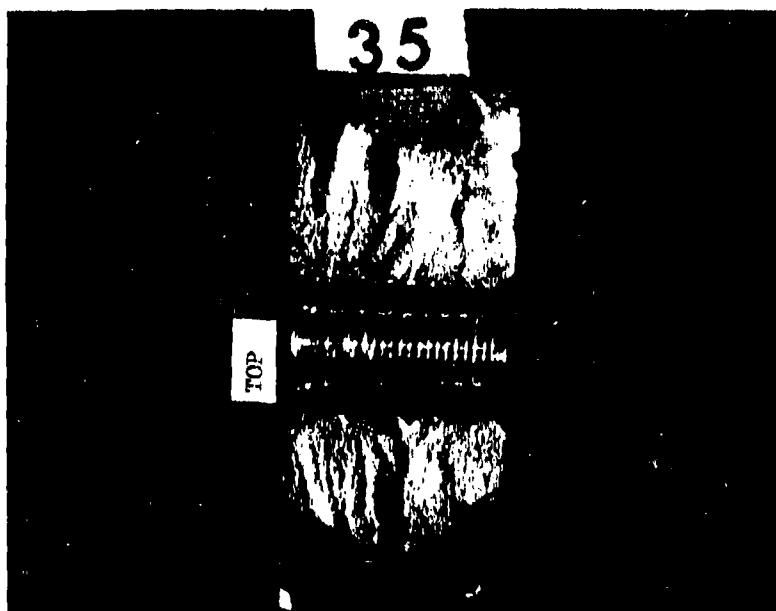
Close-up of Fatigue Failure of Specimens with Long-Lok 1/4-28 Size Inserts. Inserts Installed by Manufacture. No Bolts in Inserts.
